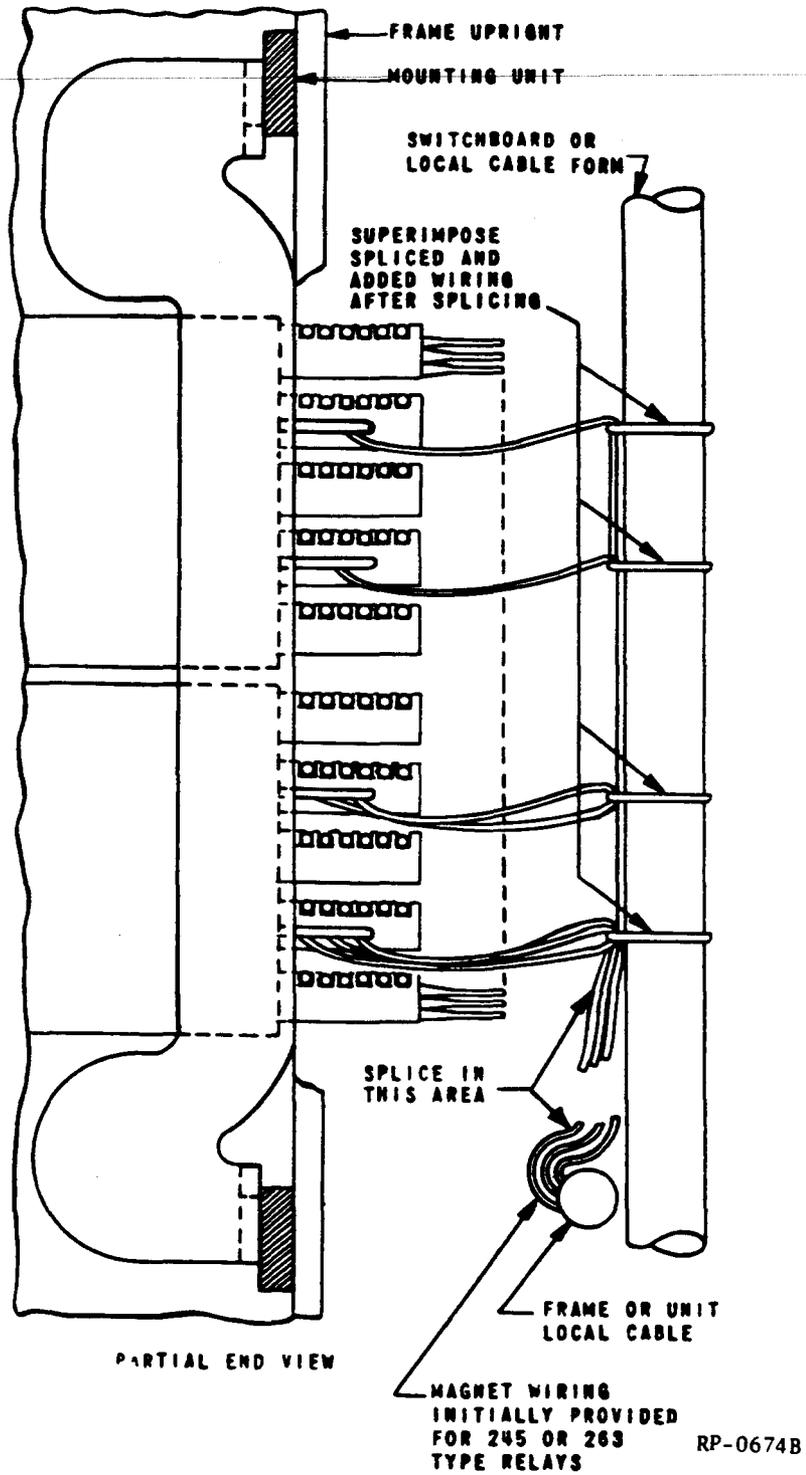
RELAYS MULTICONTACT 287 AND SIMILAR TYPES METHOD OF EXTENDING MAGNET SKINNERS AND INTERMAGNET WIRING (PAR. 4.12B, 4.12C, 4.12D)
